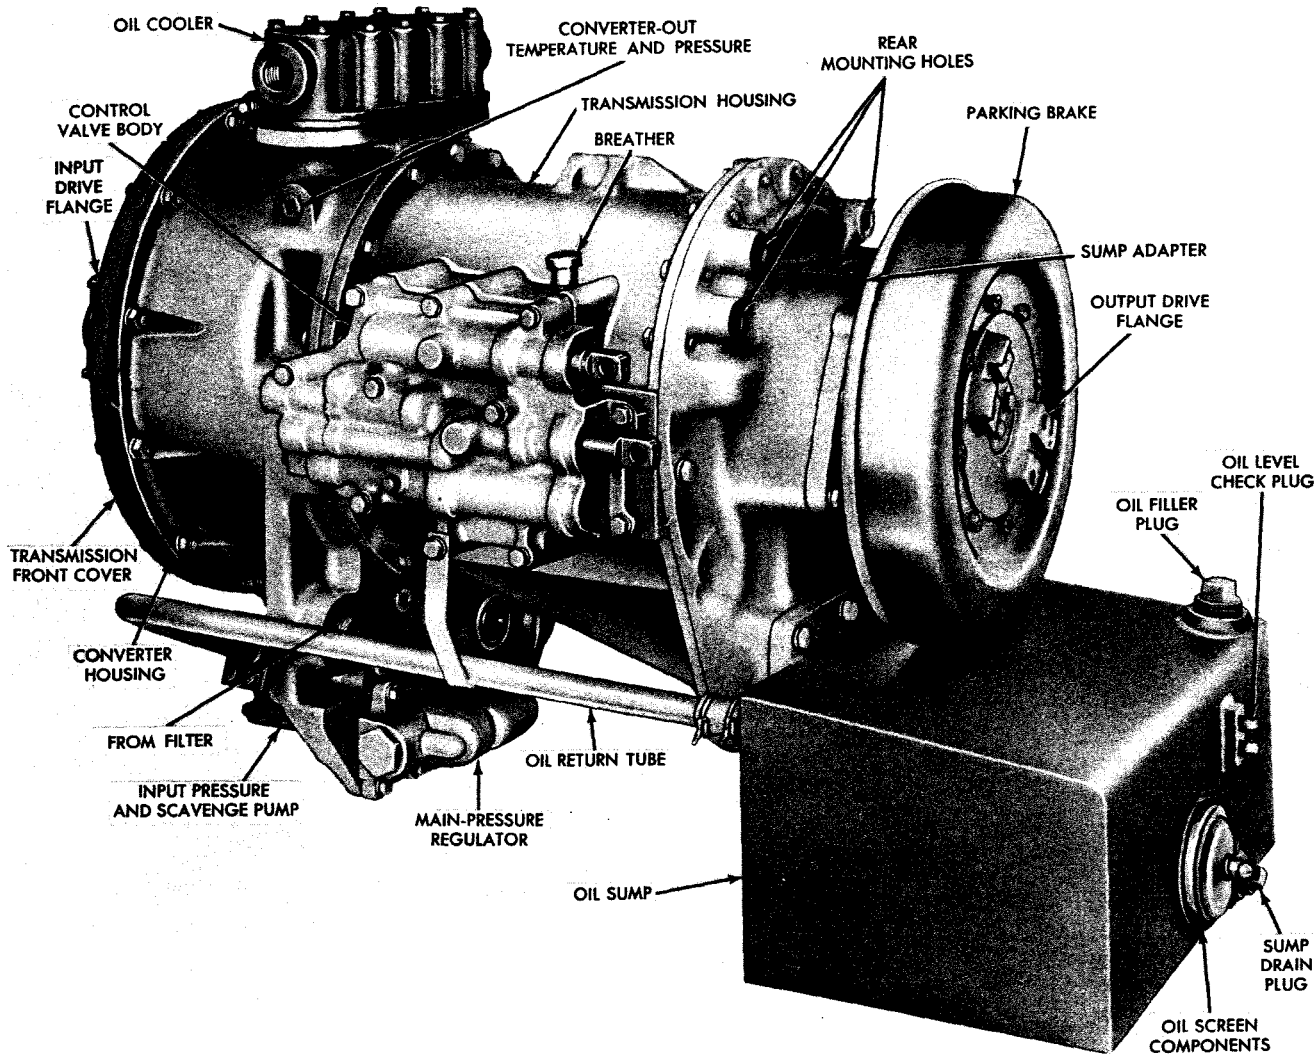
Model CRT 3531-3 Torqmatic transmission with remote-mount option—left-rear view
